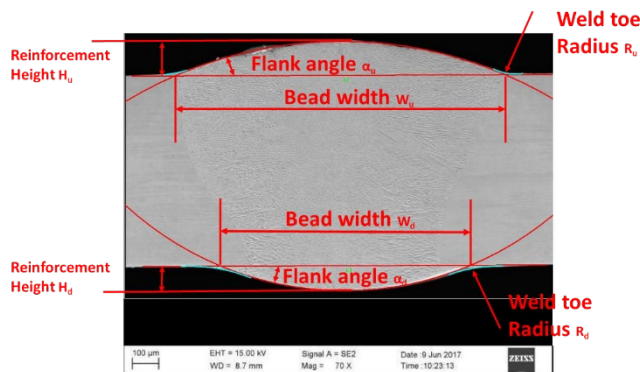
Cross-section of weld bead of pulsed laser welding with filler wire.
